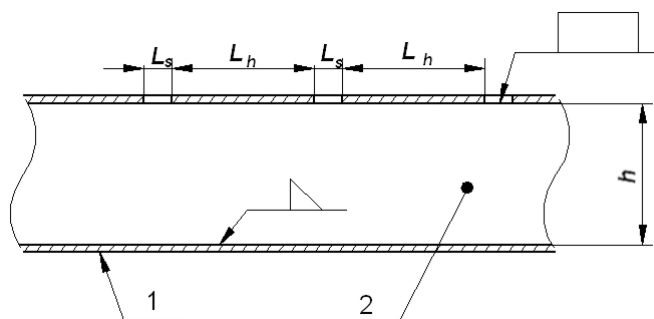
Design type I; 1 – plate; 2 – rib; L_h – length of the weld; L_s – distance between welds.
